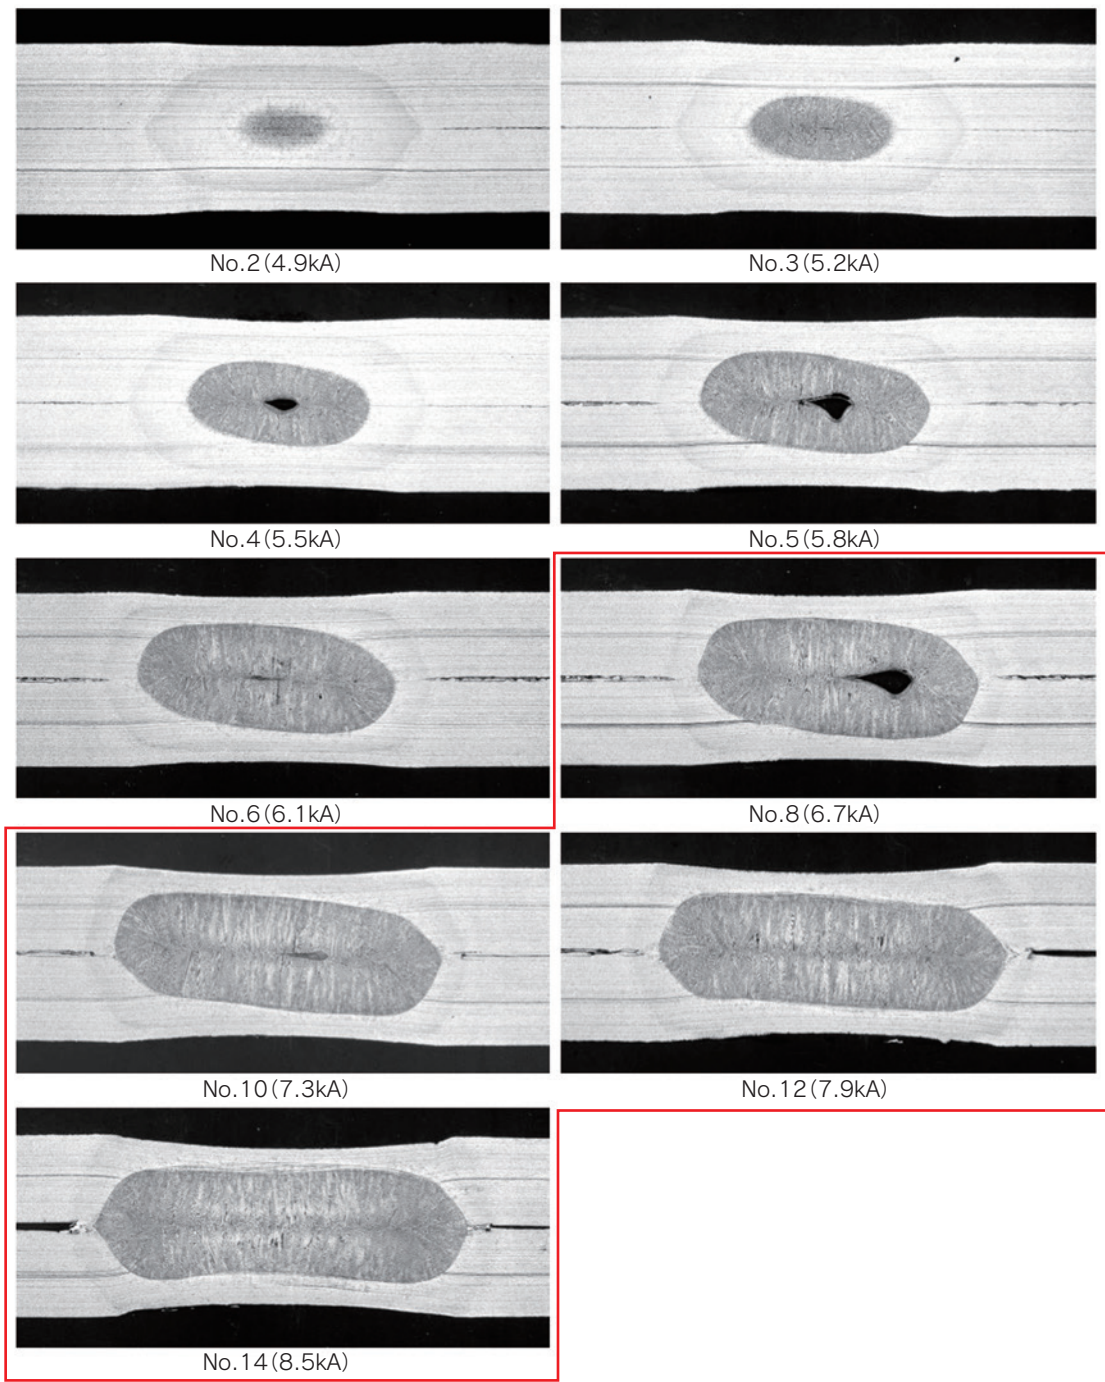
Cross sections of welds (Enclosure line is appointed at suitable welding current range)
